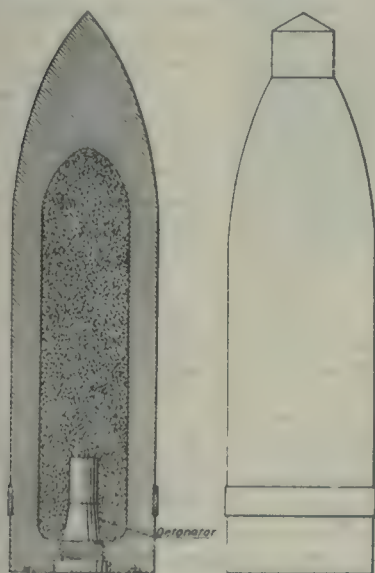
SIMPLEST FORM OF EXPLOSIVE PROJECTILES.
